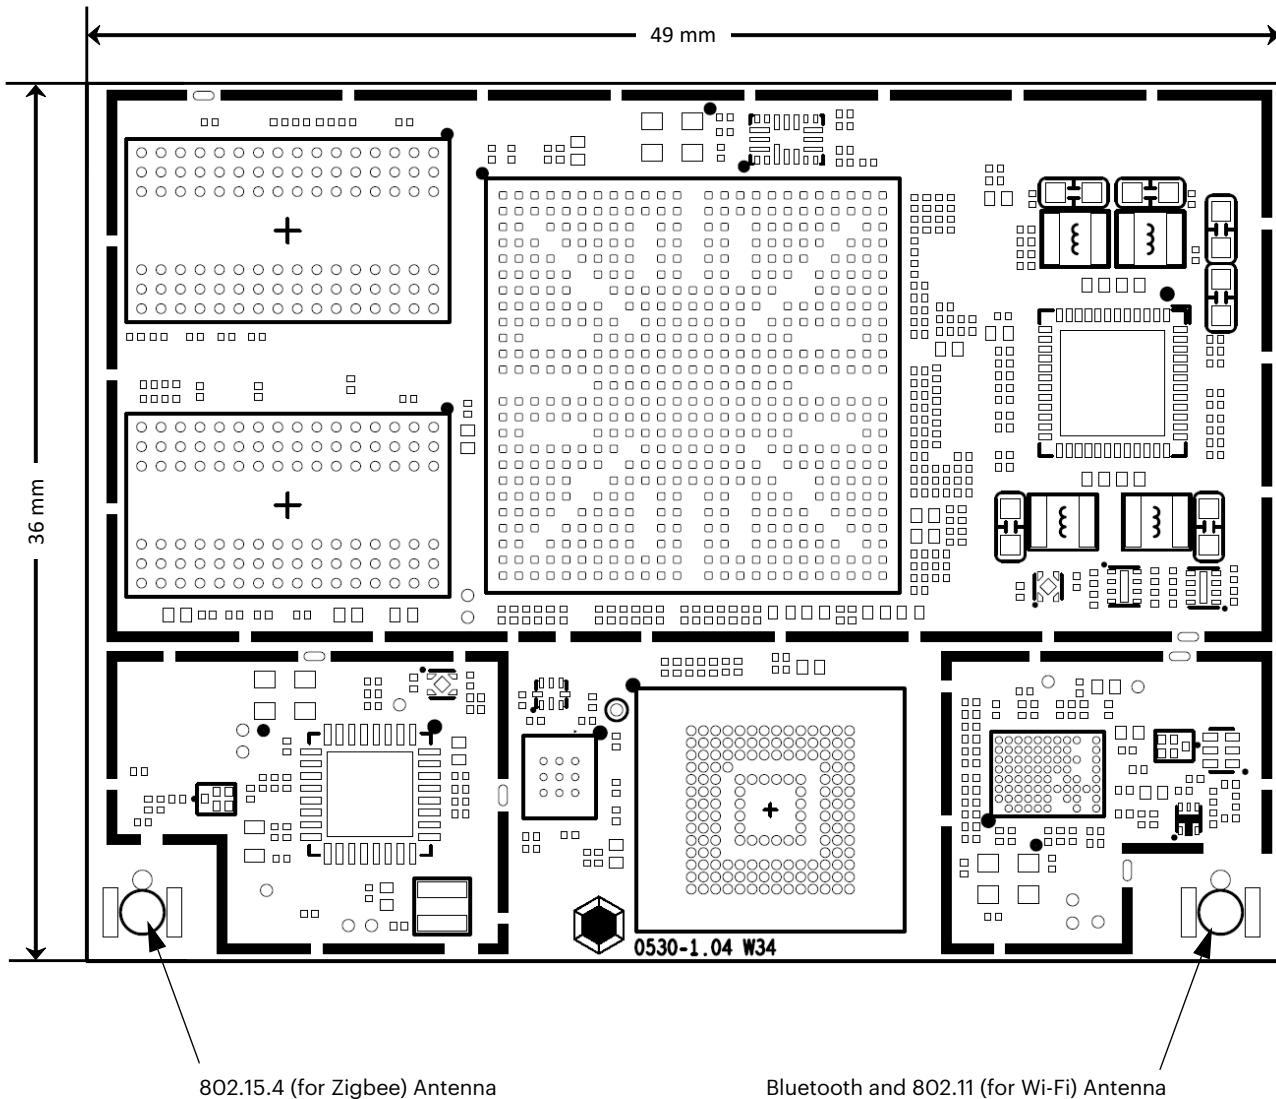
ARTIK 530/530s Module Top View Mechanical Dimensions and Part Location
